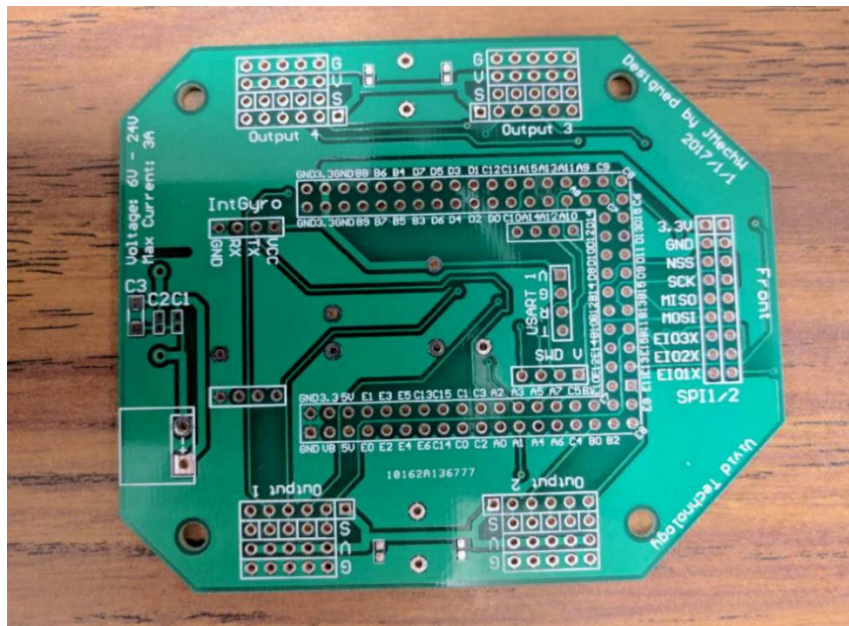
Printed Circuitry Board of JMechW Robotic Board
